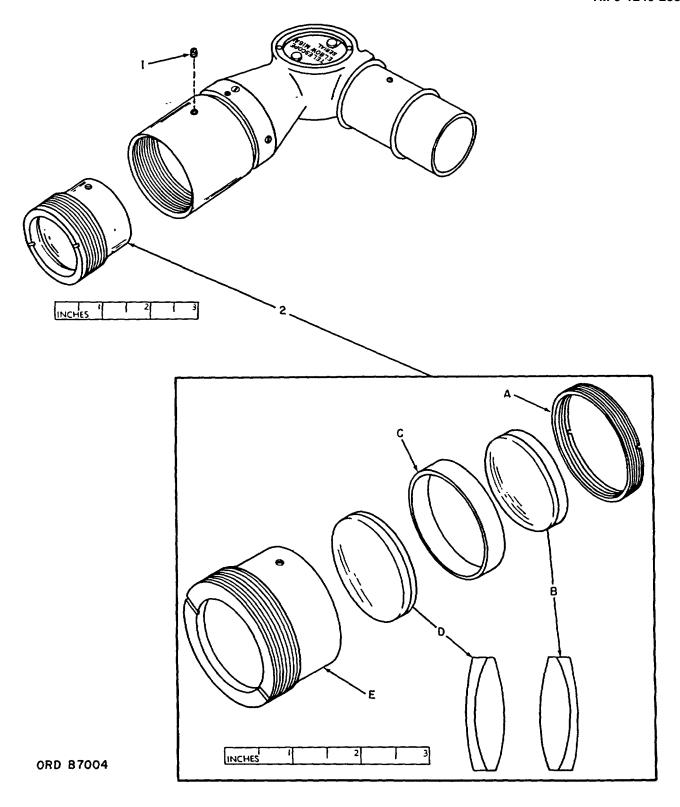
Removal and disassembly of eyepiece assembly-partial exploded view.
